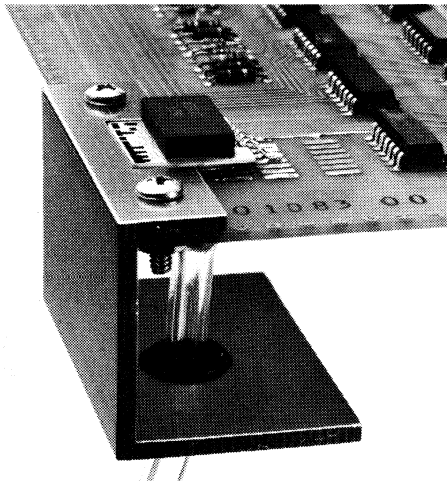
PX6(D) in PC Board for Dip Soldering
